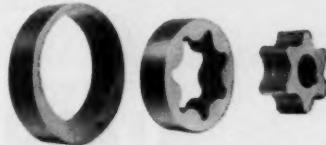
Three Gerotor components permit pump to be incorporated as integral part of housing or frame of mechanism, eliminating need for purchase and mounting of separate, complete pump.
